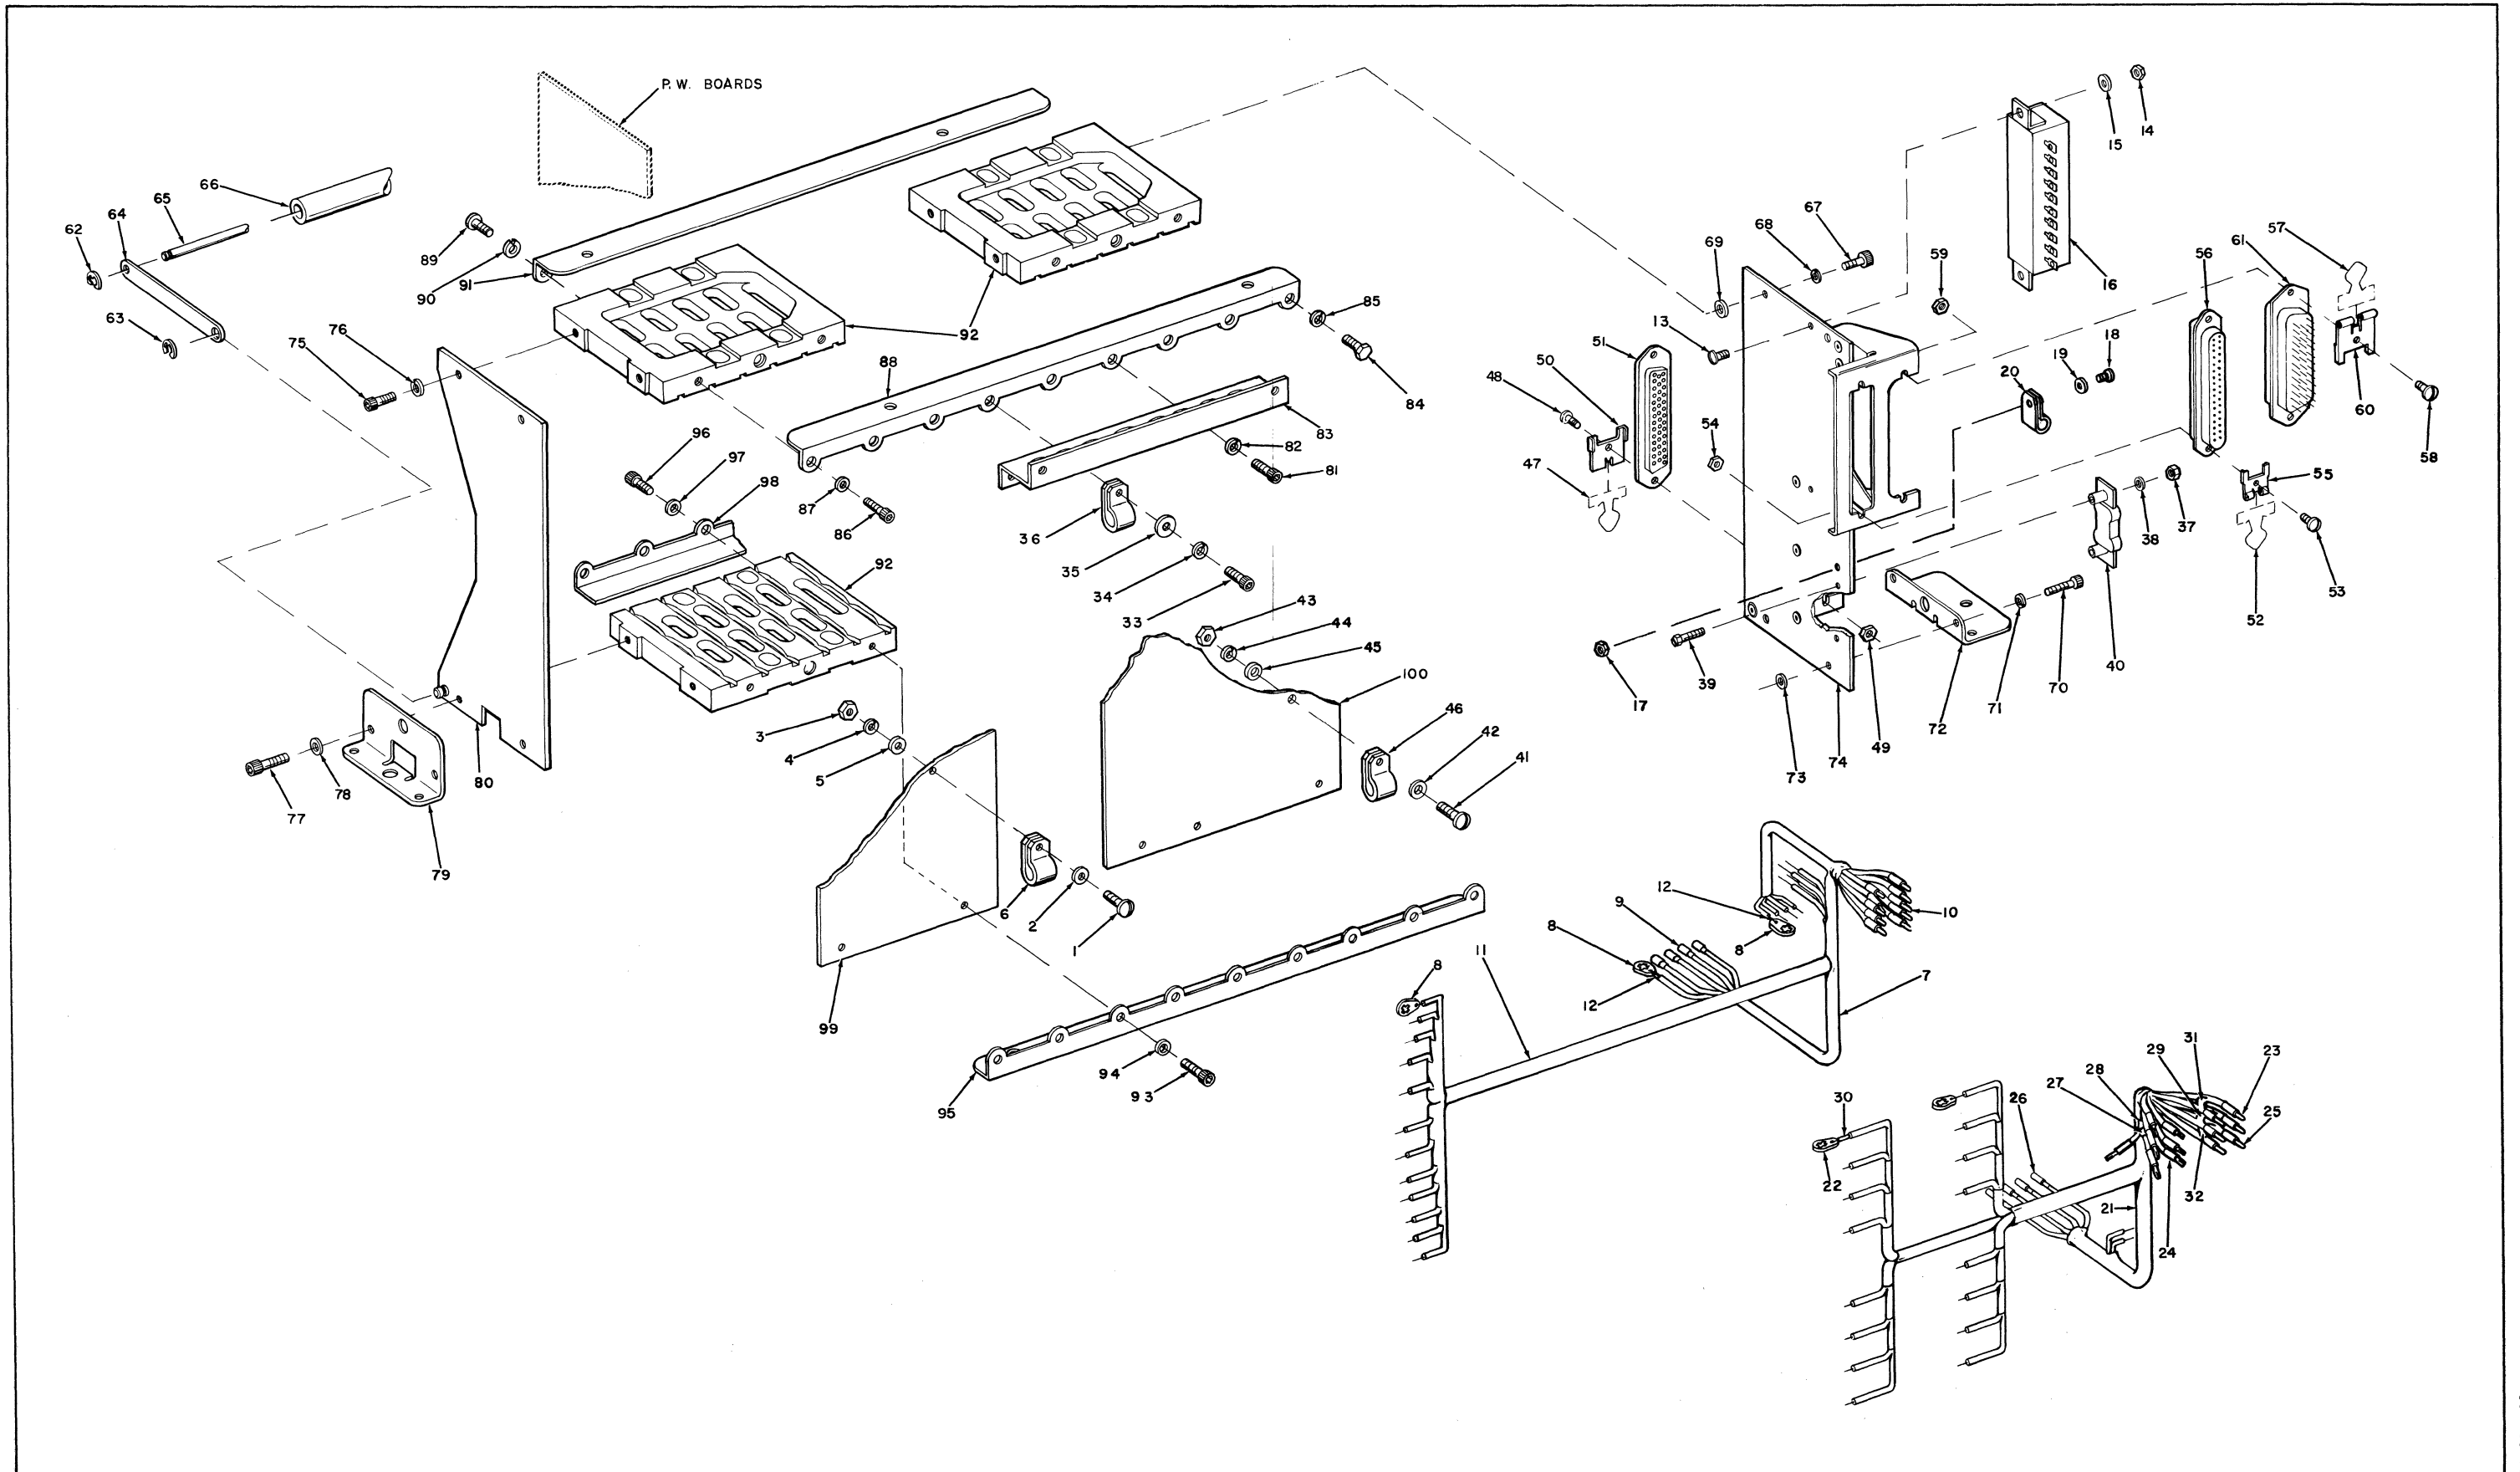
D-37. Printed wiring boards frame assembly, exploded view.
